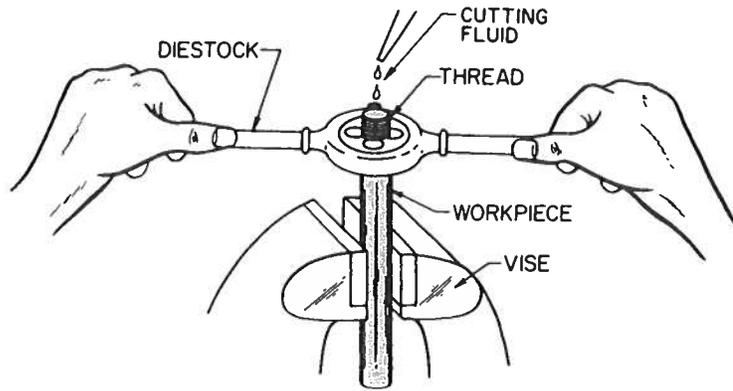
The hands may be moved to the ends of the diestock after cutting several threads.
